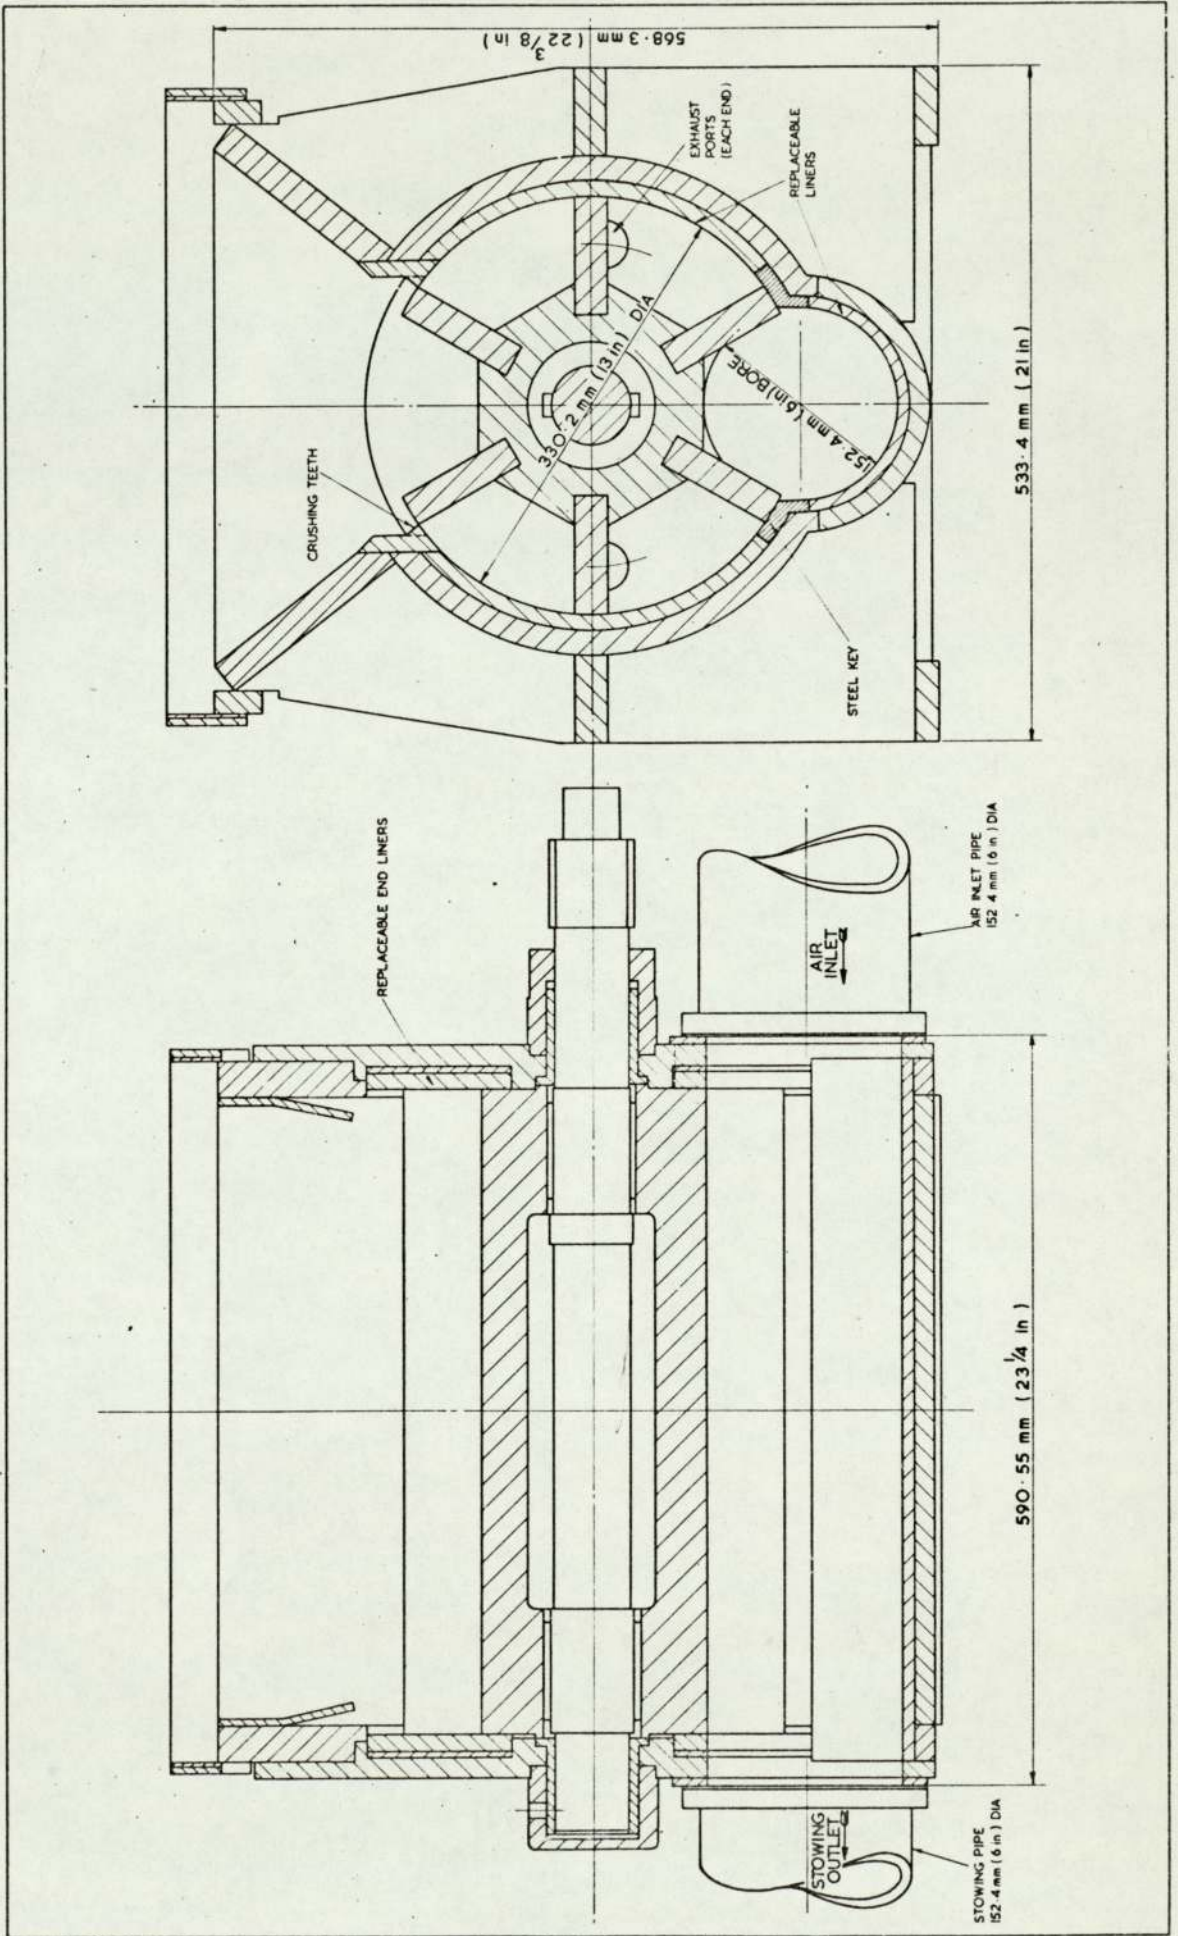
FINAL STOWER DESIGN (5 OR 6 PADDLE ROTOR)
